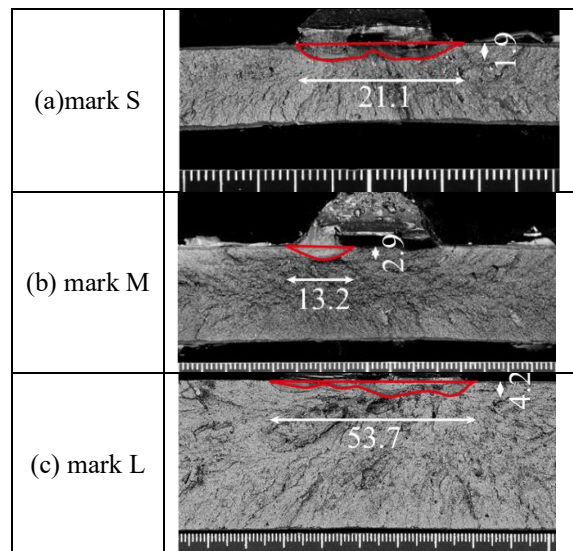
Fracture appearance and ductile crack extension size of each specimen
